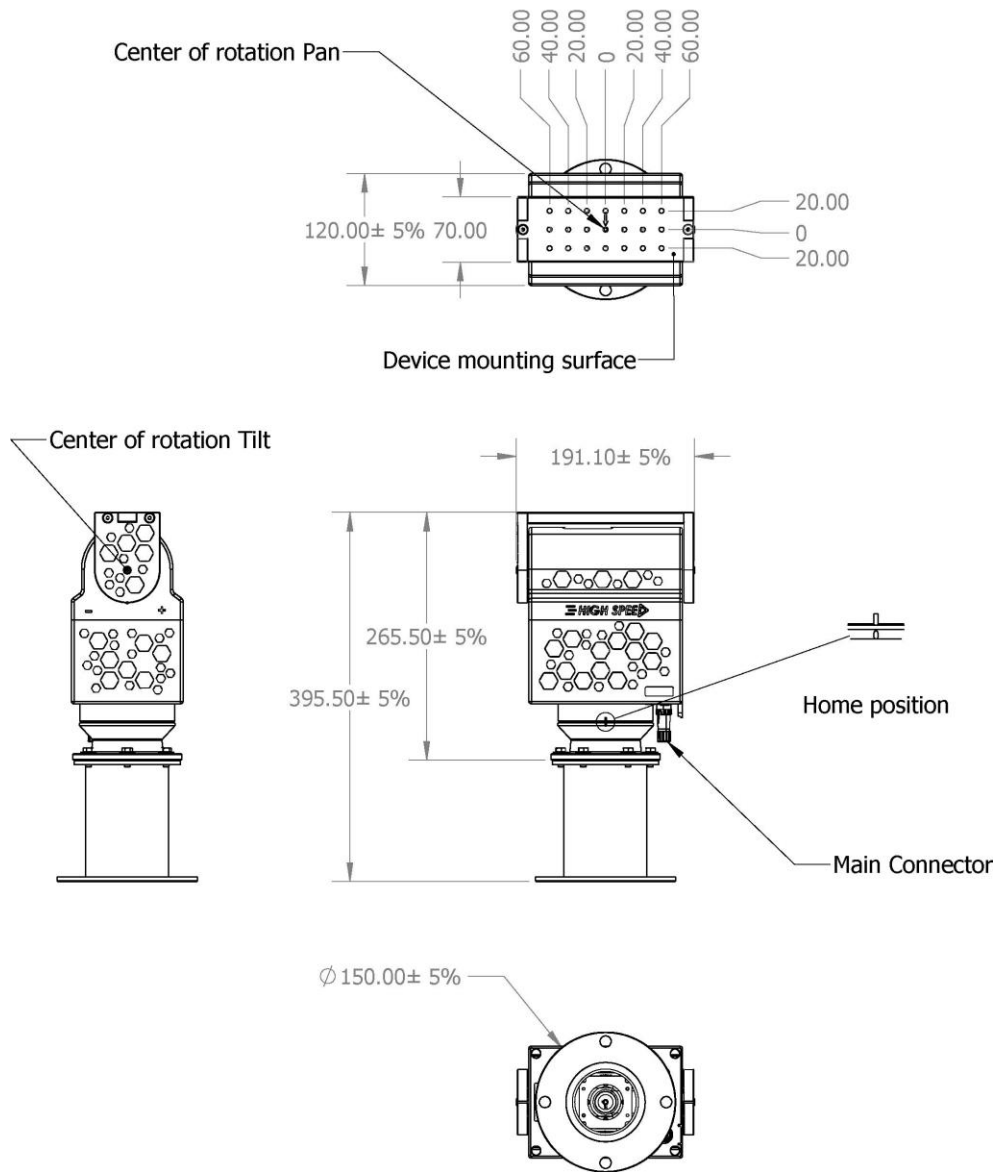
PANTILT4030HWS outline drawing, units: mm
